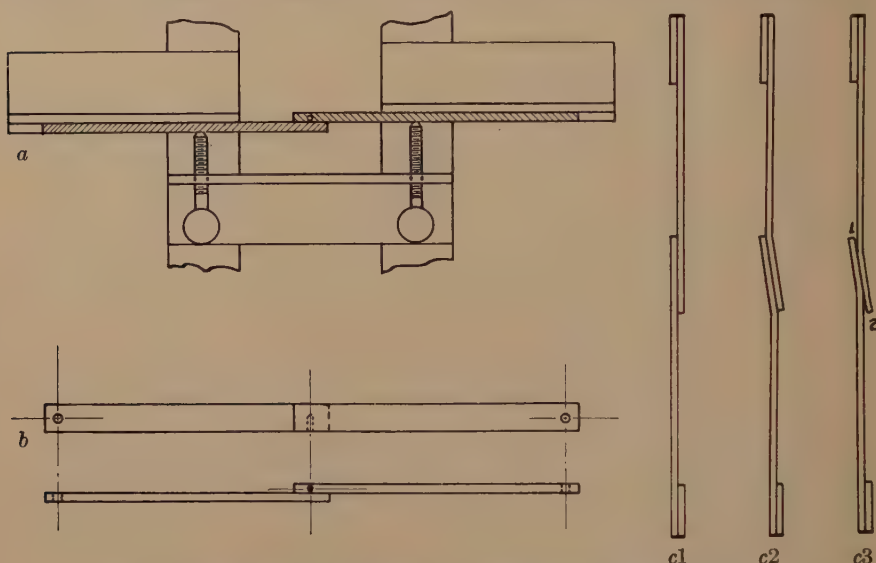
APPARATUS FOR MAKING AND TESTING SOLDERED LAP JOINTS.
